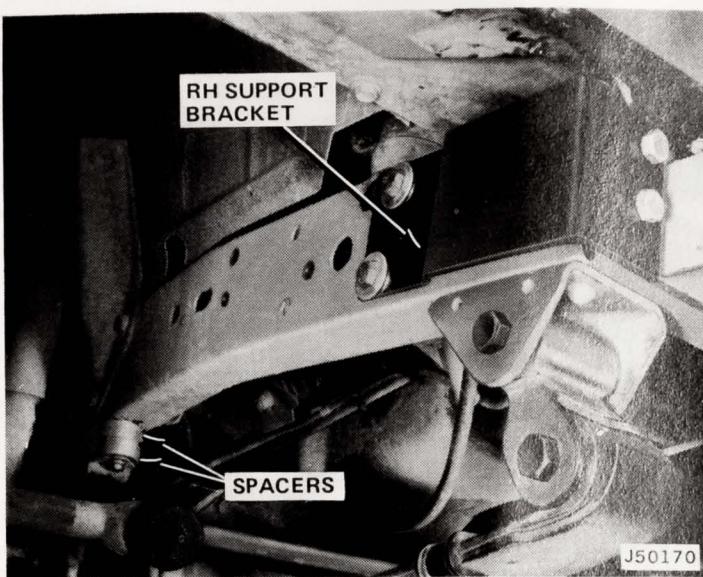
Right Hand Mounting and Spacers—Cherokee-Truck
